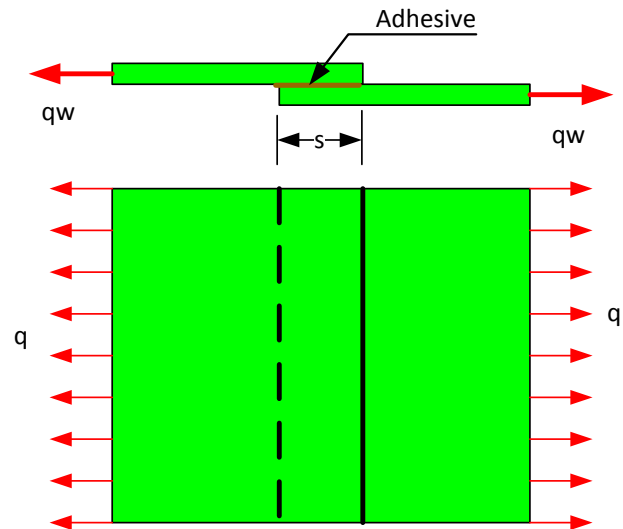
A single lap joint fabricated with a thin film of adhesive.
